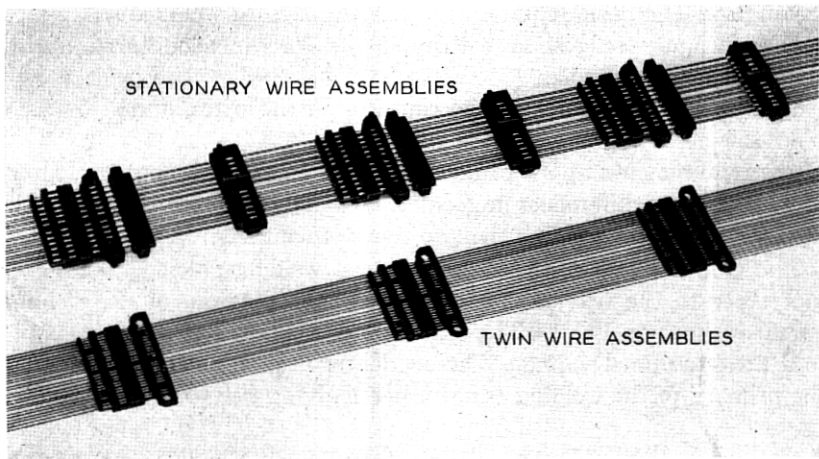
Molded stationary and twin wire assemblies, before cutting to length.
